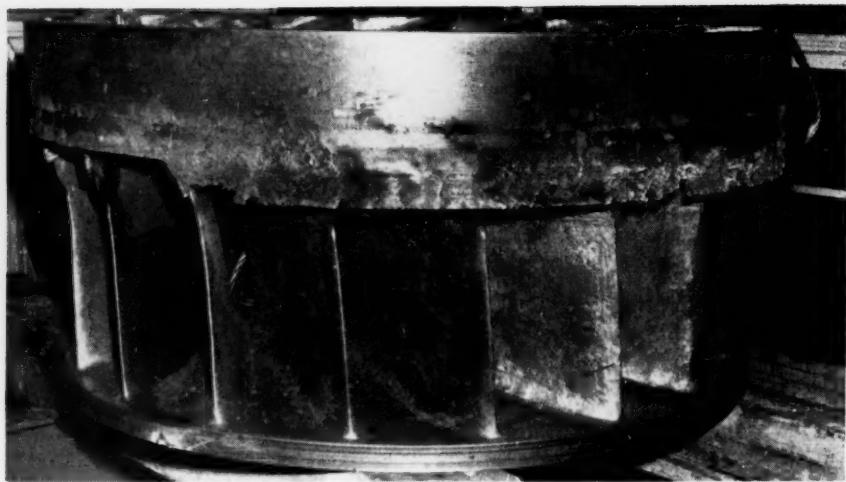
One of the pitted runners from a 20,000 h.p. horizontal machine. This runner had 40 years of service.
